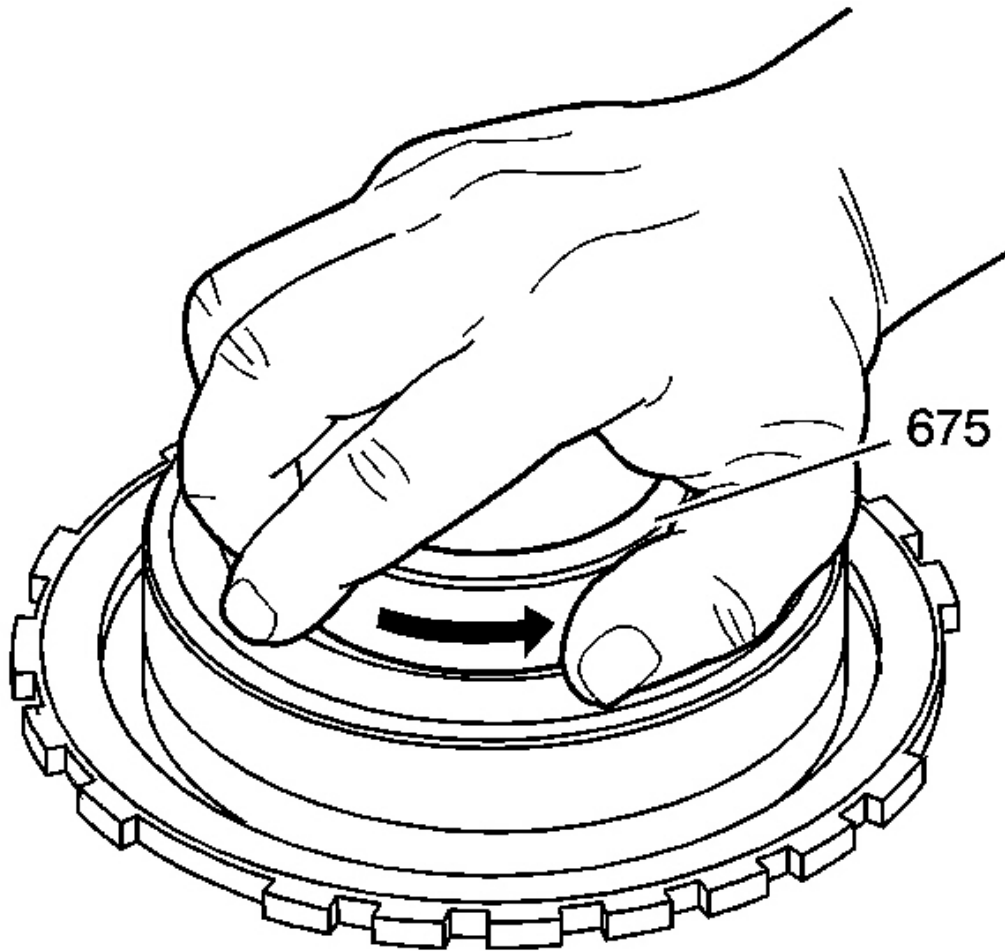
Checking Low And Reverse Roller Clutch Race Rotation
